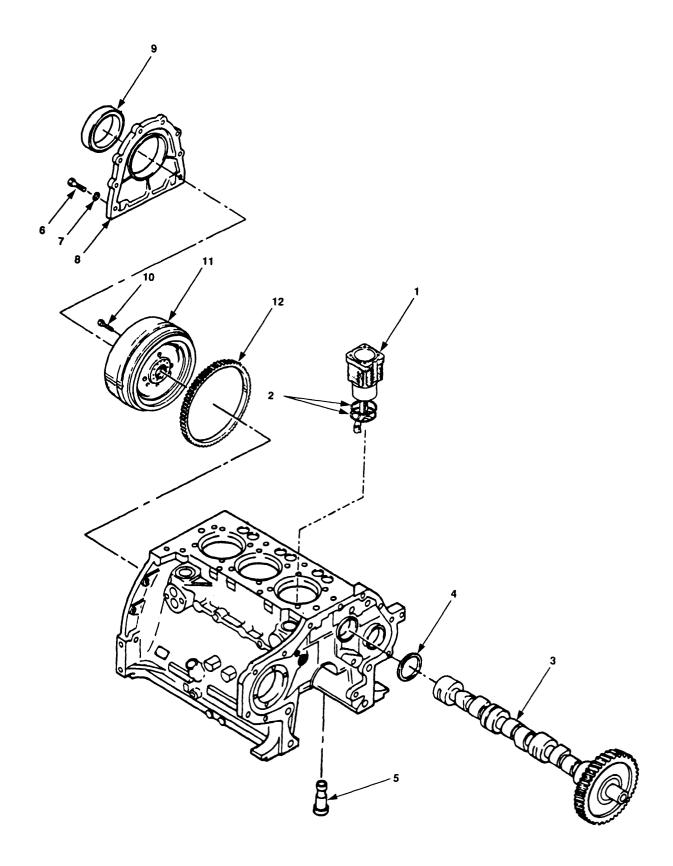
Cylinders Camshaft and Flywheel Removal.
